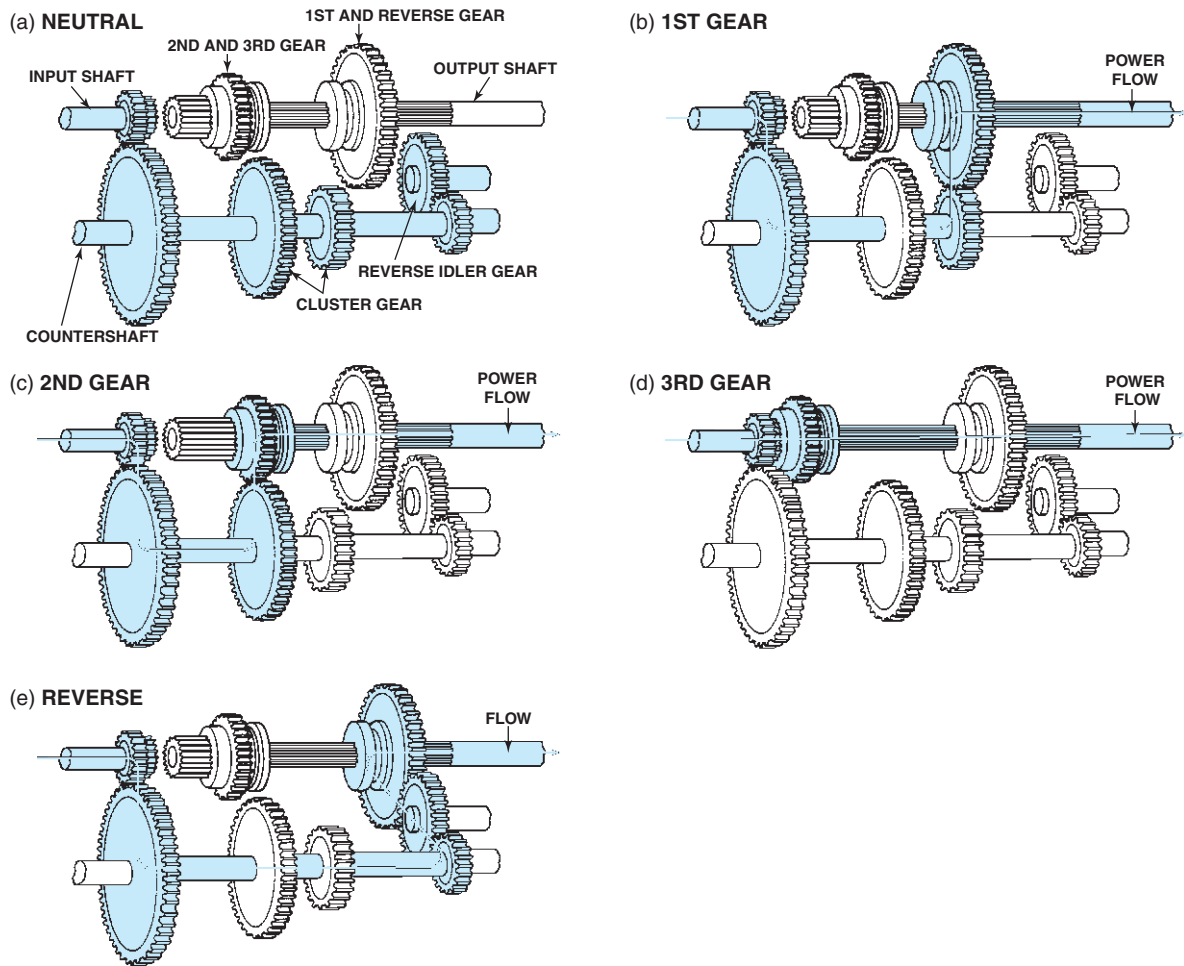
(a) Very simple transmission in neutral (no output gears in mesh); (b) first gear—the first-reverse gear is slid into mesh with the cluster gear; (c) second gear—the 2–3 sliding gear is in mesh with the cluster gear; (d) third gear—the 2–3 sliding gear is in mesh with the input shaft; and (e) reverse—the first-reverse gear is in mesh with the reverse idler gear.
